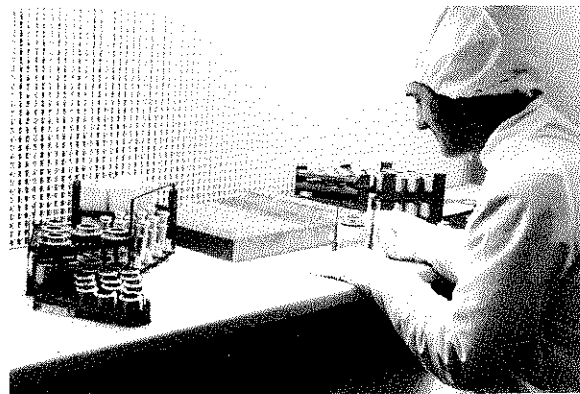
Assembly of ceramic vacuum switches in a laminar flow cabinet.
